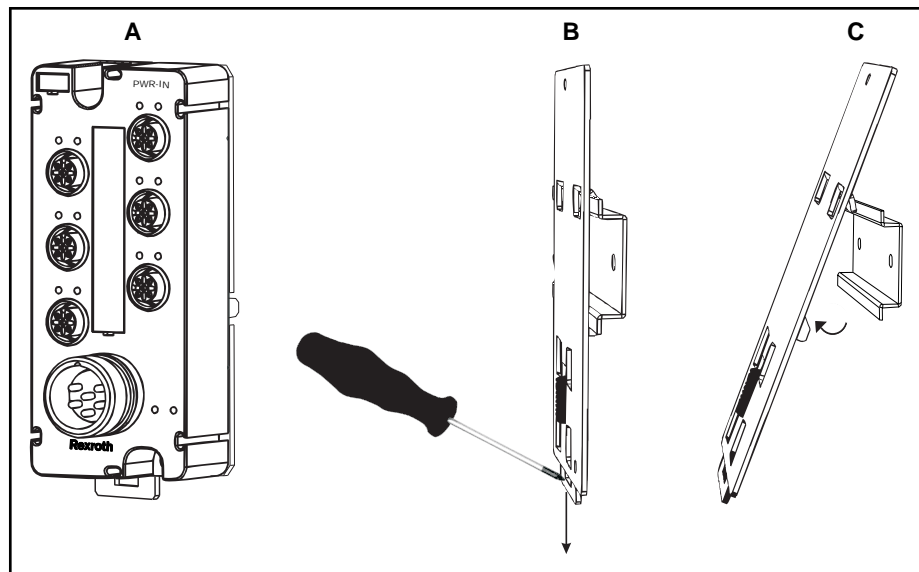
Removing module with mounting rail adapter from mounting rail
